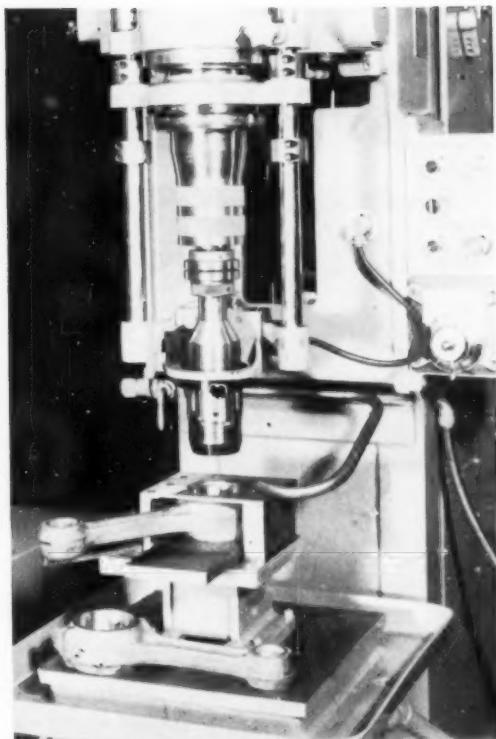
Simple parallel-plate fixture for a connecting rod with a block for controlling torque of the operation. The tool is rigid and takes possession of the part.
